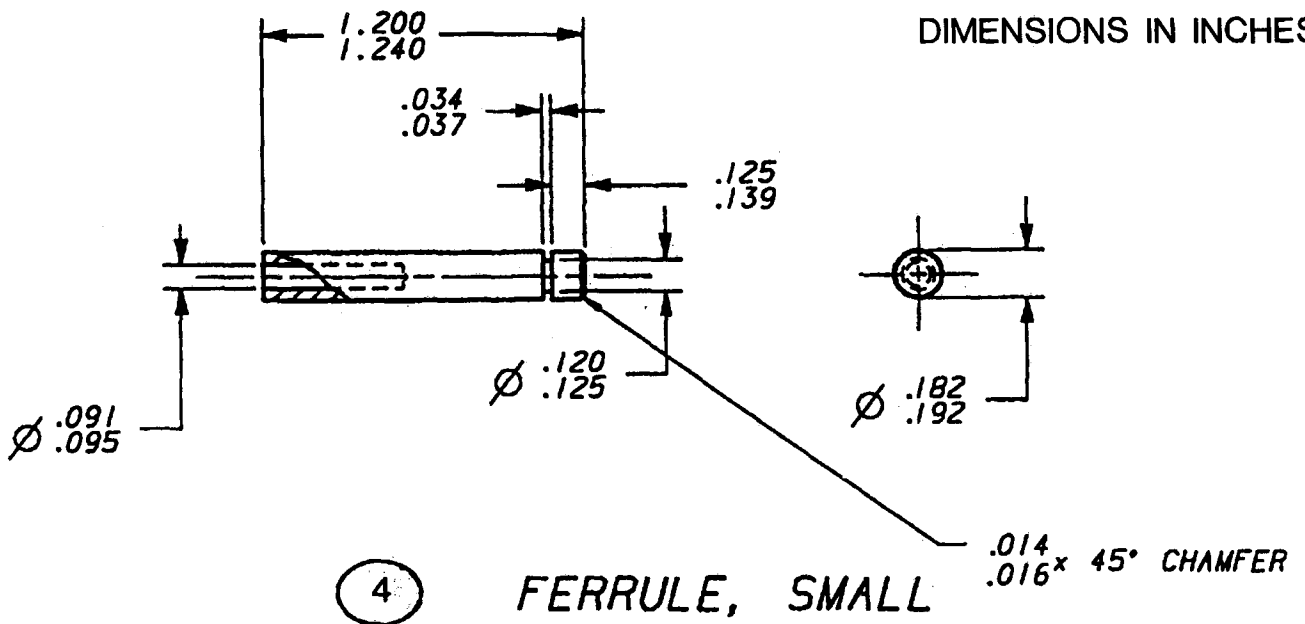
Control cable end fitting assembly, MA-2, MA-6, MA-8, MA-14 and MA-16 type inertia reels
